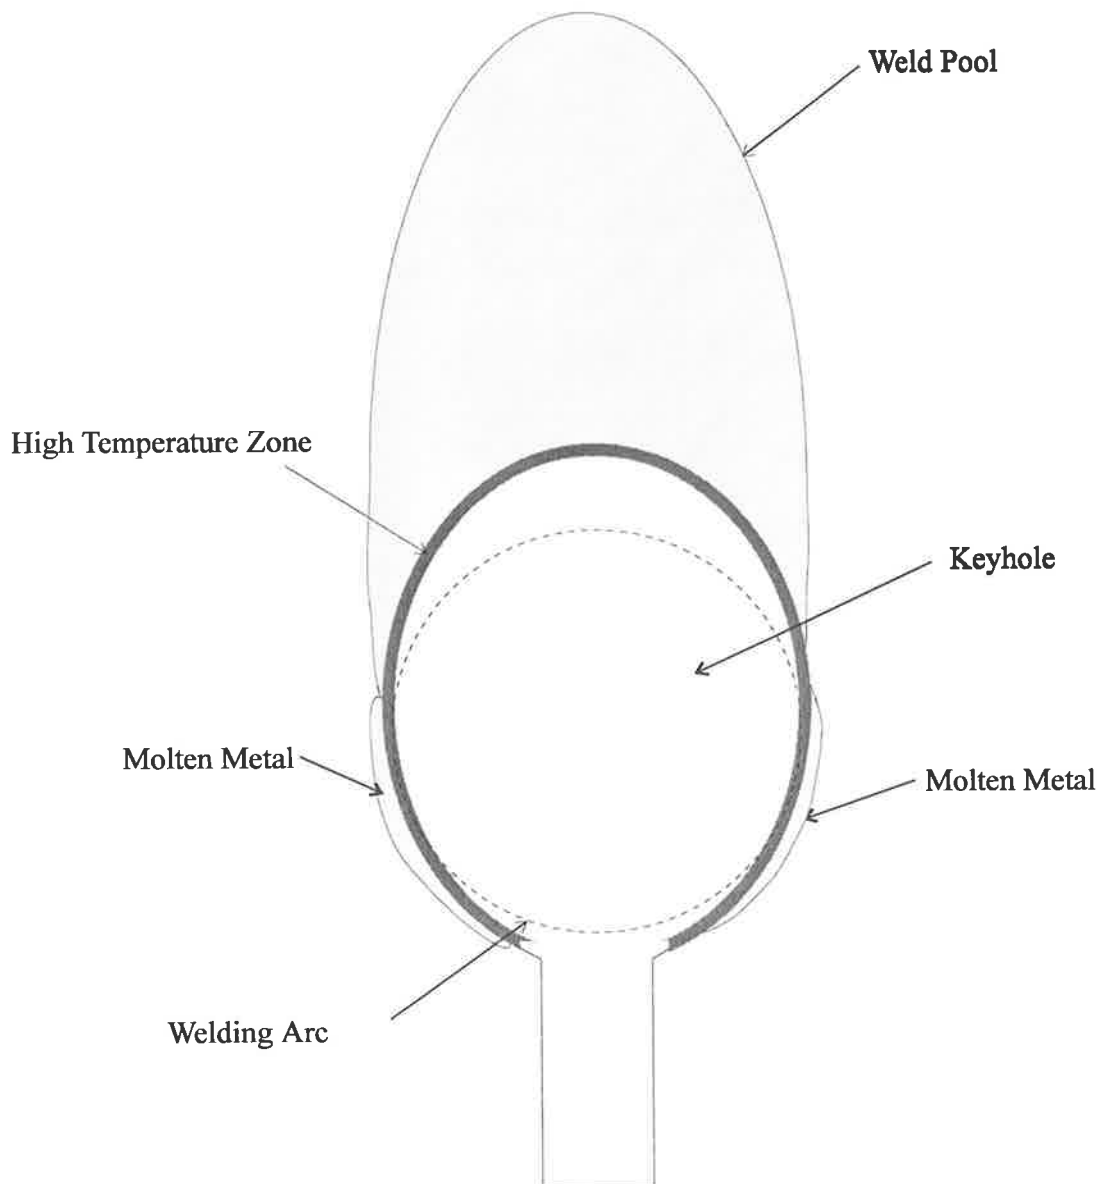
Schematic of showing the position of the keyhole, weld pool and welding arc, and the transfer of metal from the electrode to the weld pool along the sides of the keyhole.
